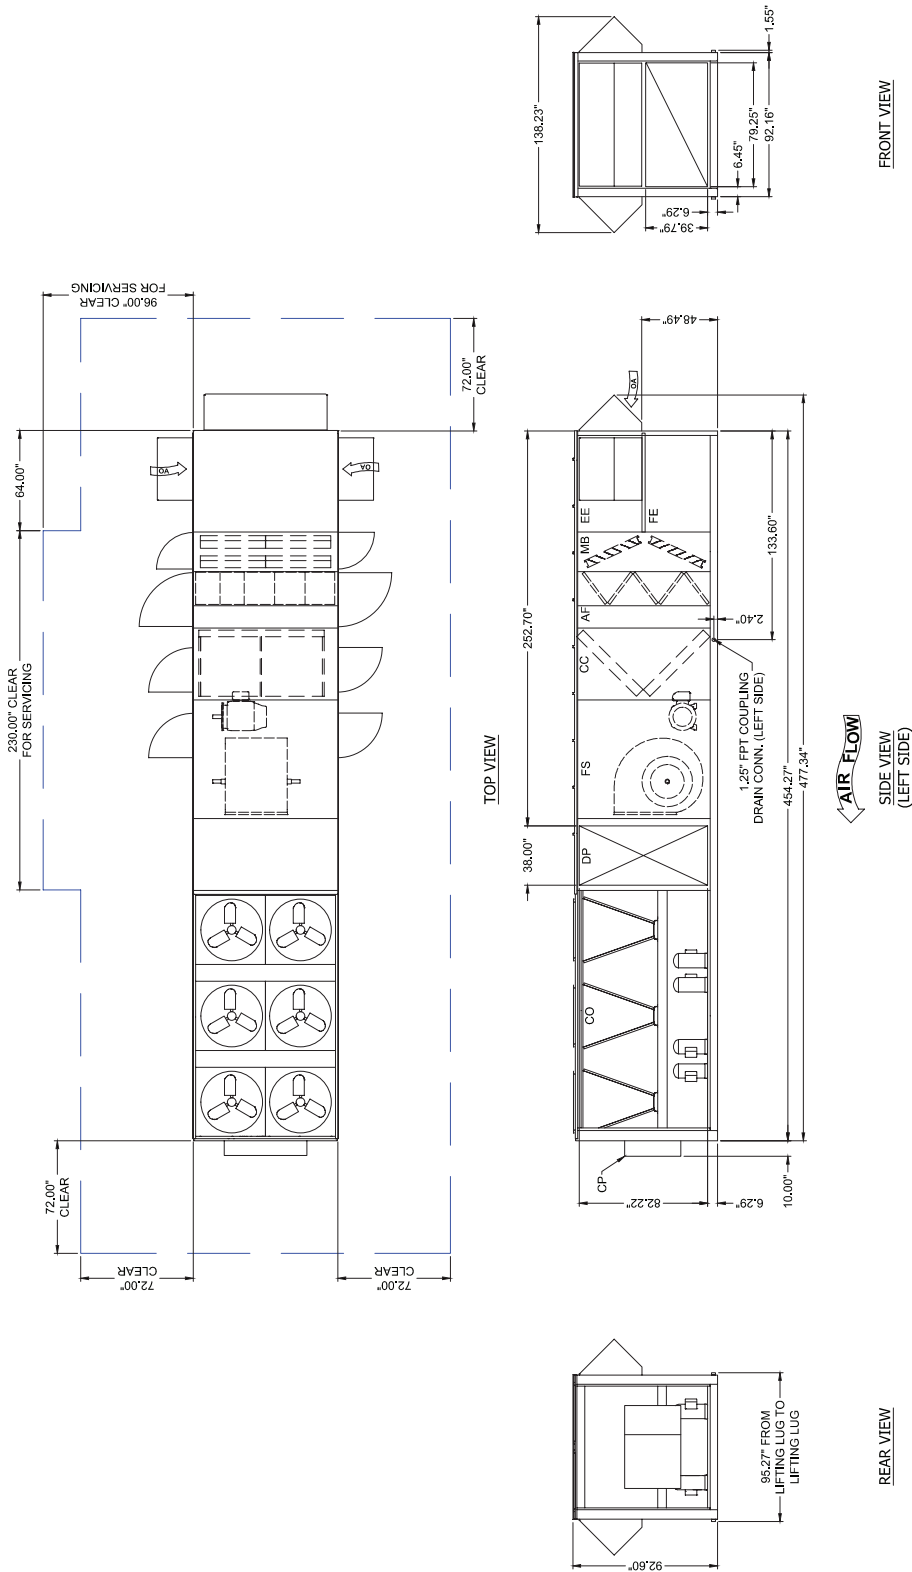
GENERAL ARRANGEMENT DRAWING
